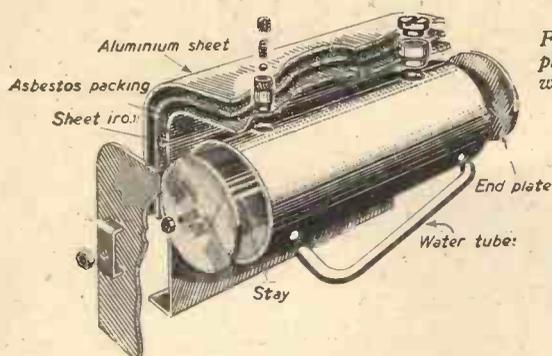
(Left).—Exploded view of boiler, with half sections of casing.
